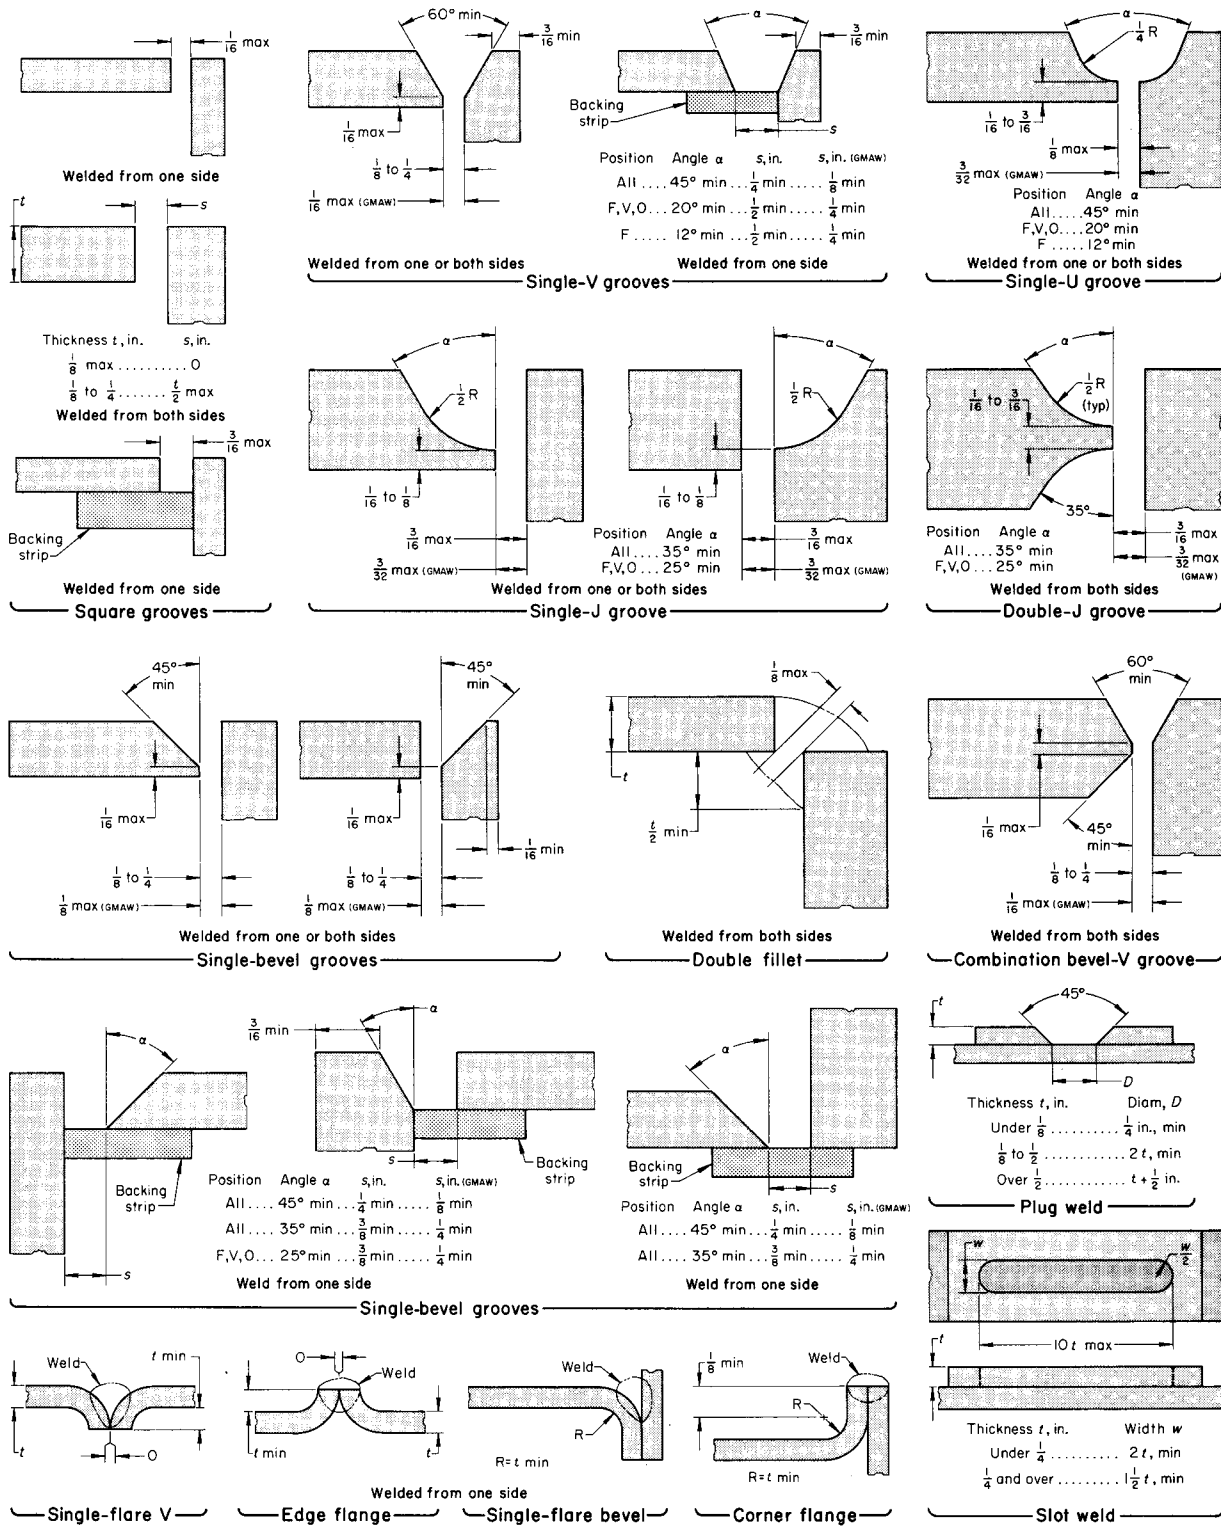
Recommended proportions of grooves for corner and flange joints and plug welds. Made by shielded metal arc welding, gas metal arc welding, flux cored arc welding, and oxyfuel gas welding (except pressure gas welding). Dimensions that apply to gas metal arc welding only are noted.
